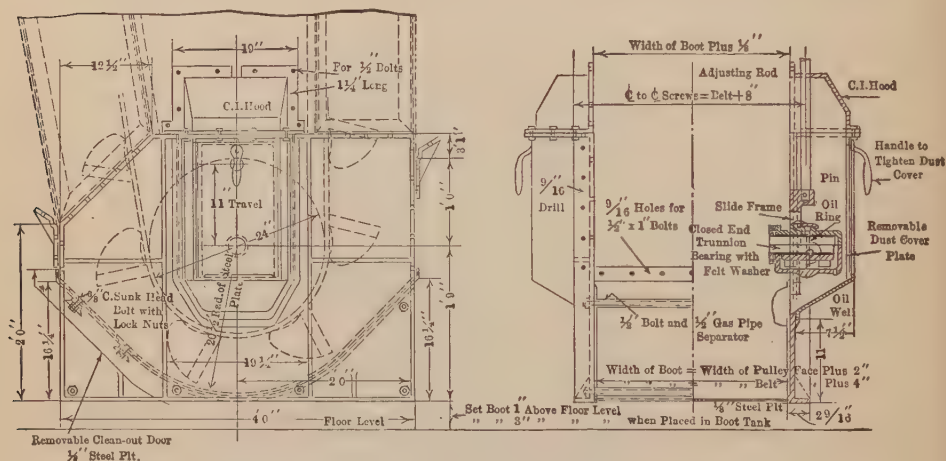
Heavy Cast-iron Grain Boot used with Steel Casing.
